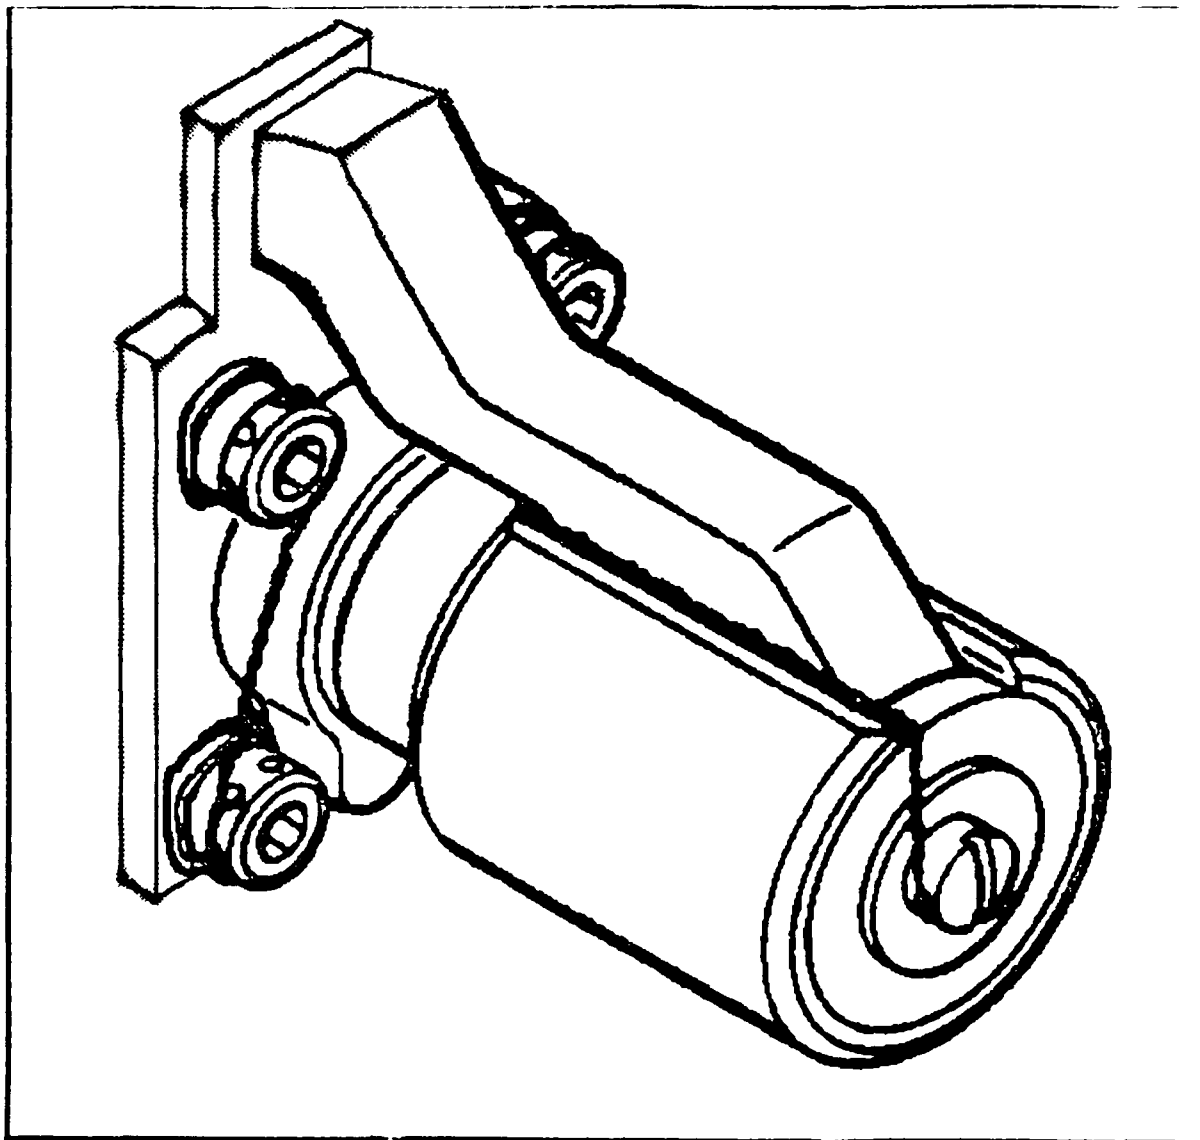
Pictorial drawing of the solenoid valve assembly.
